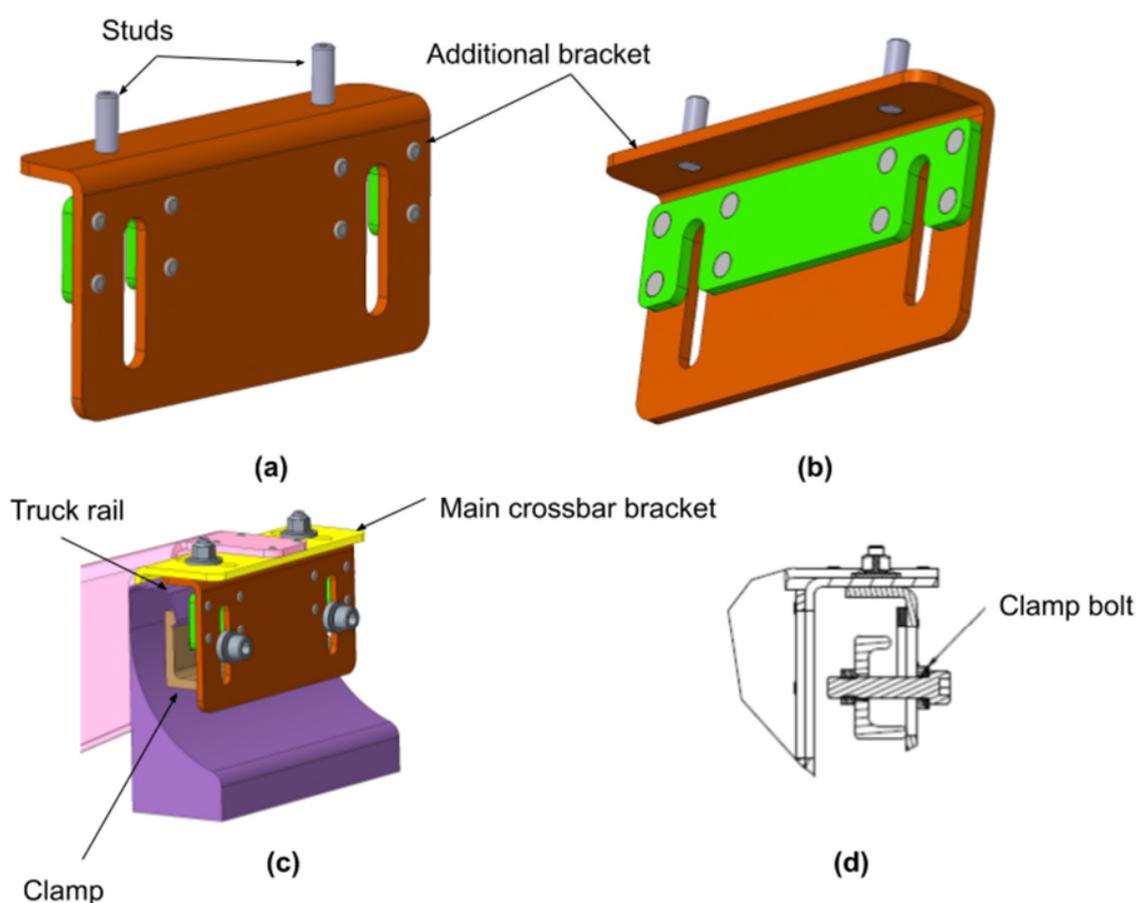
Views of additional bracket utilized to attach the crossbar to outer bed rail
